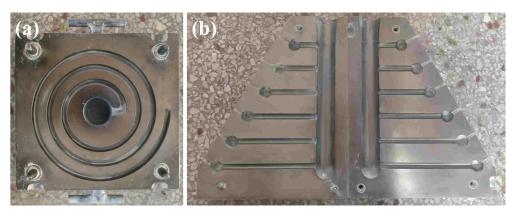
The Mg-Y-Ni alloy casting properties test molds: (a) fluidity and (b) hot tearing mechanism
